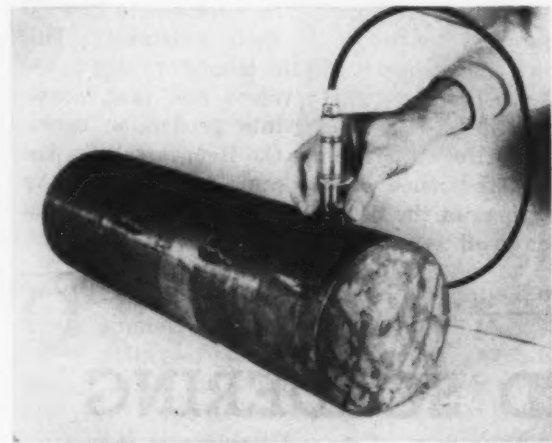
The $2\frac{1}{4}$ megacycle, 1-in. straight unit, used in preliminary test of drill collars.
